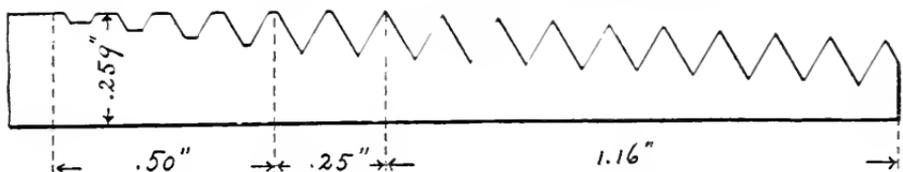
SECTION THROUGH A FIVE-INCH PIPE.
